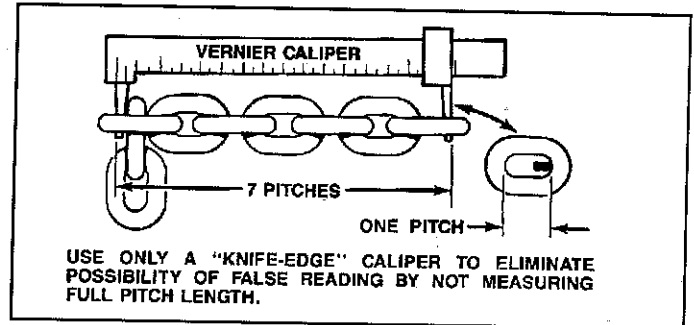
Checking Coil Load Chain Using Vernier Caliper.
